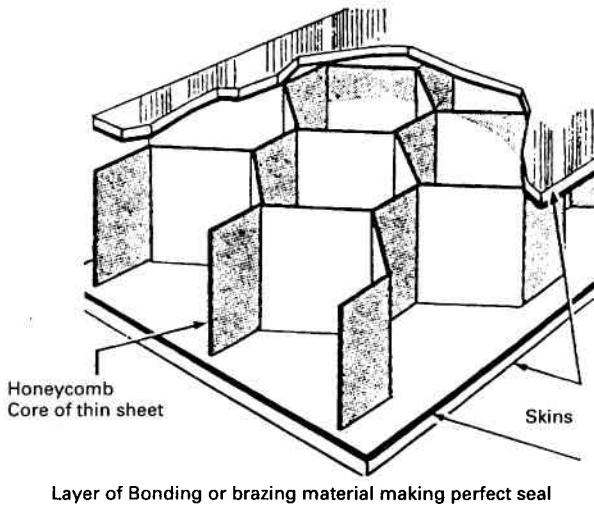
Section of stainless steel honeycomb sandwich panel
